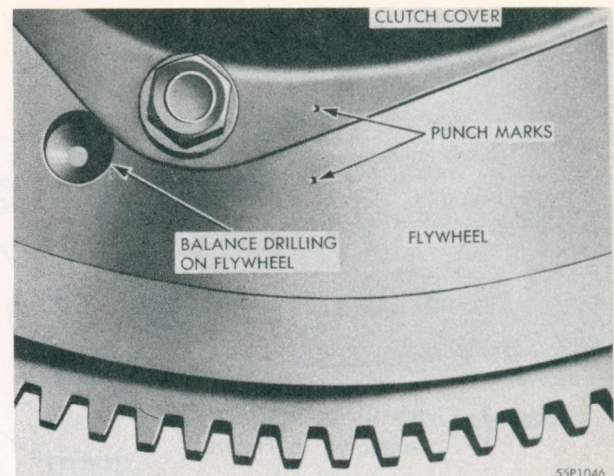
Punch Marks on Clutch Cover and Flywheel
